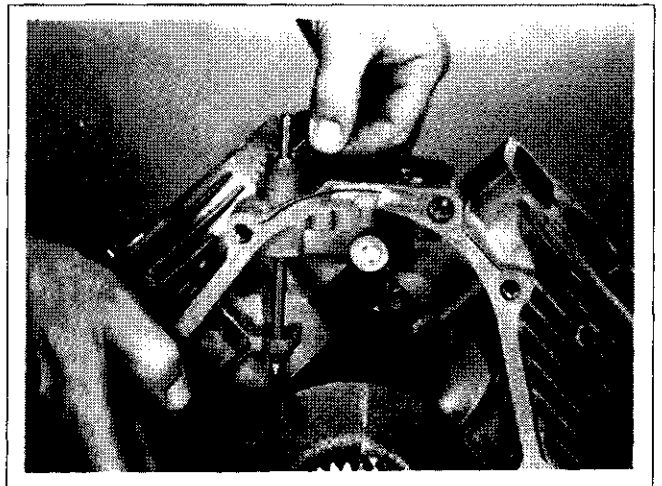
Removing Governor Cross Shaft Hitch Pin.
